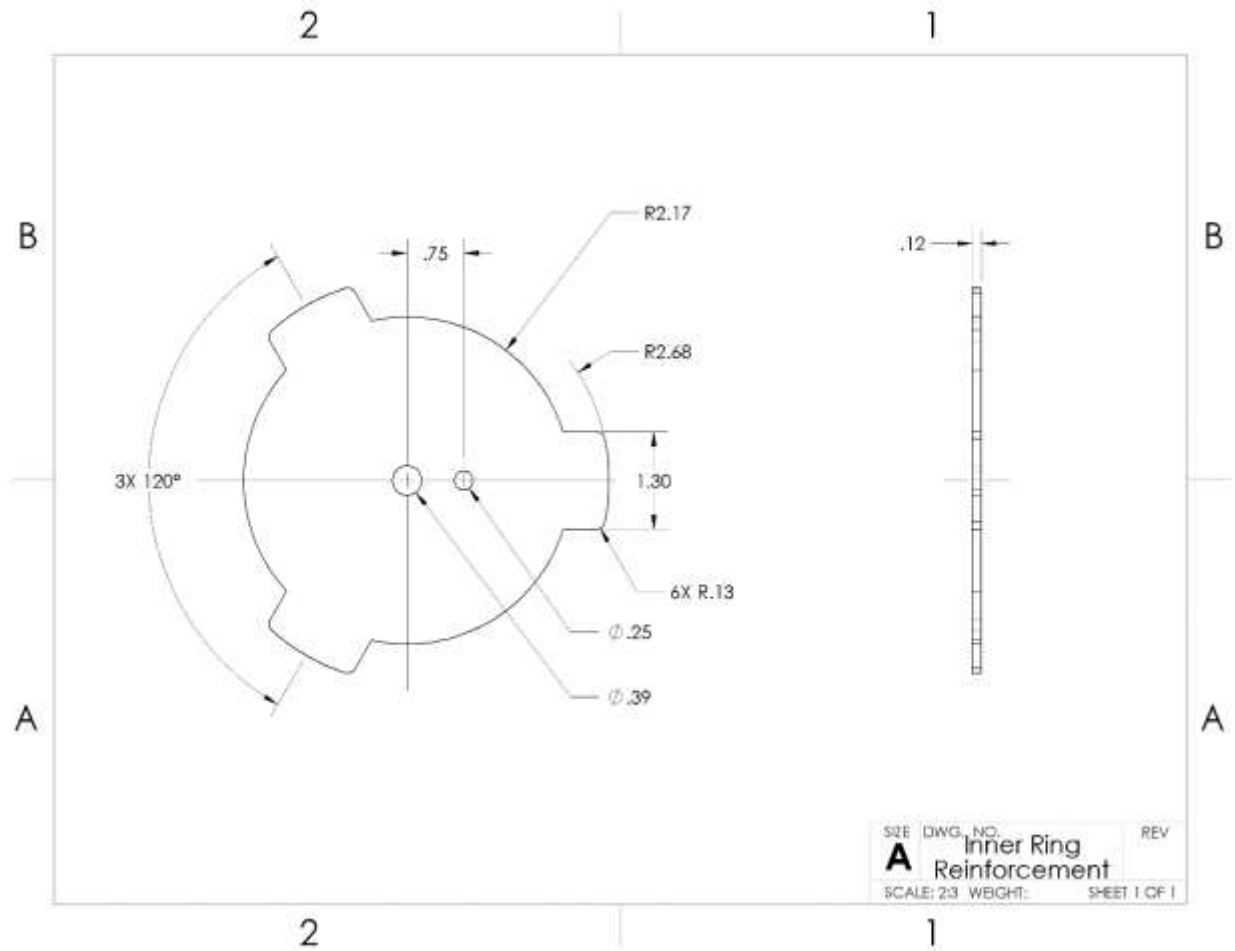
Locking Mechanism Inner Ring Reinforcement Drawing
